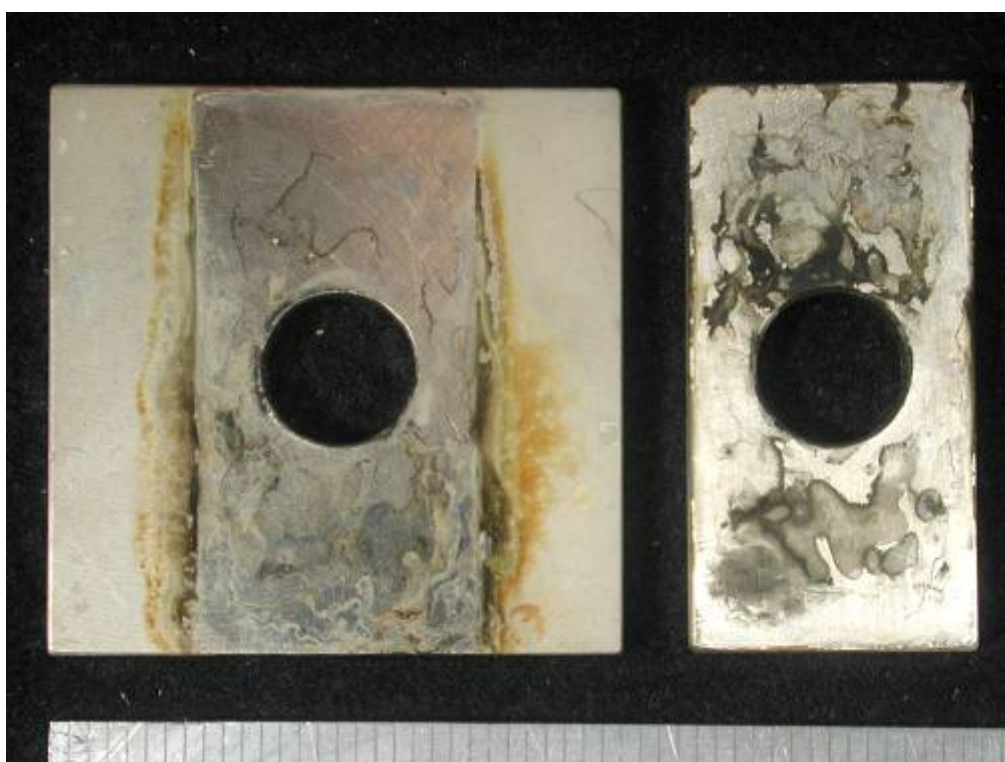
Welded Alloy 625 coupons after test in 500 ppb O₂, before cleaning.
